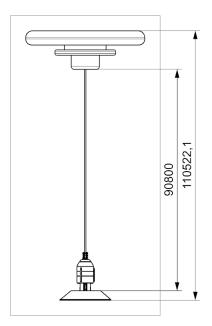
Side view of the assembled space elevator with dimensions (km) [own source].
